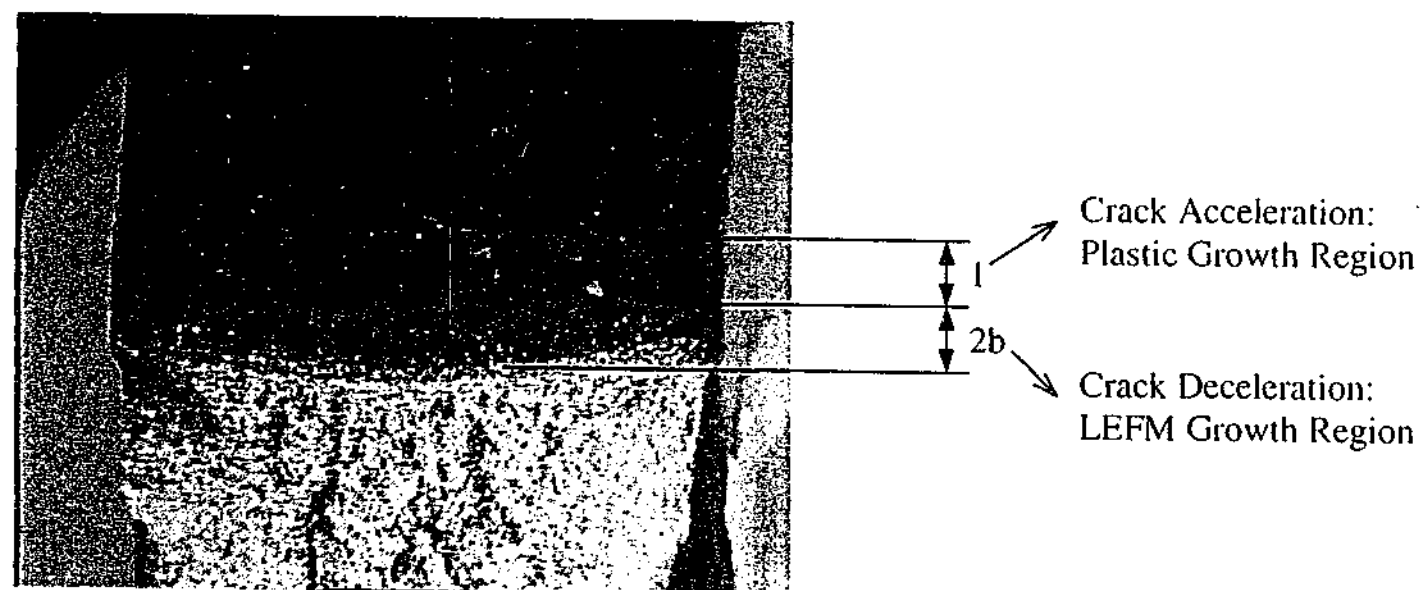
Fracture surface, specimen #3, notch position 1.
